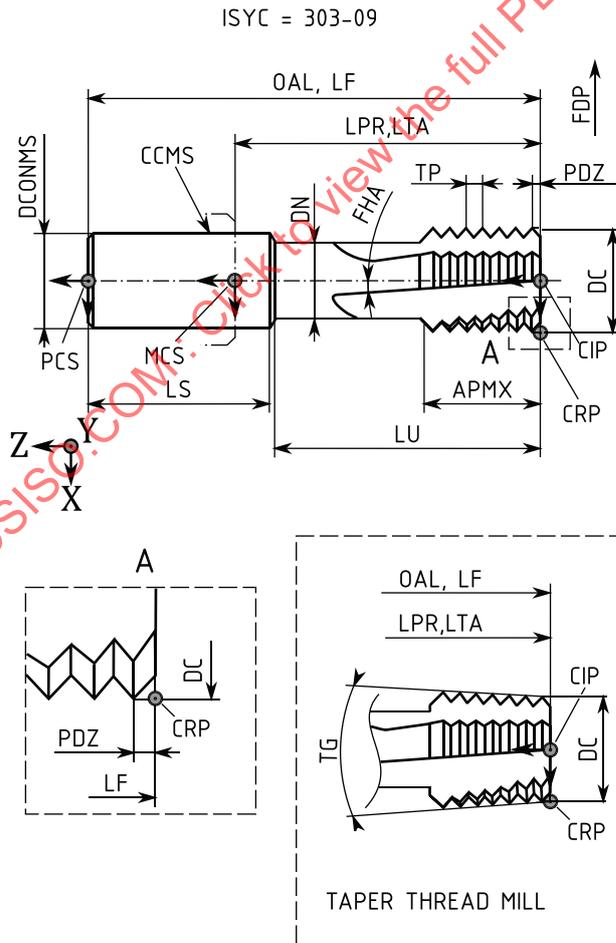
ISYC 303-09 - Thread end mill, solid
